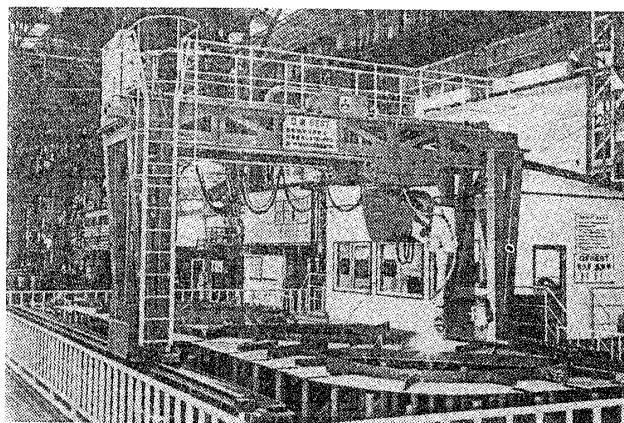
A photograph of the arc welding Robot for shipbuilding sub-assembly works
